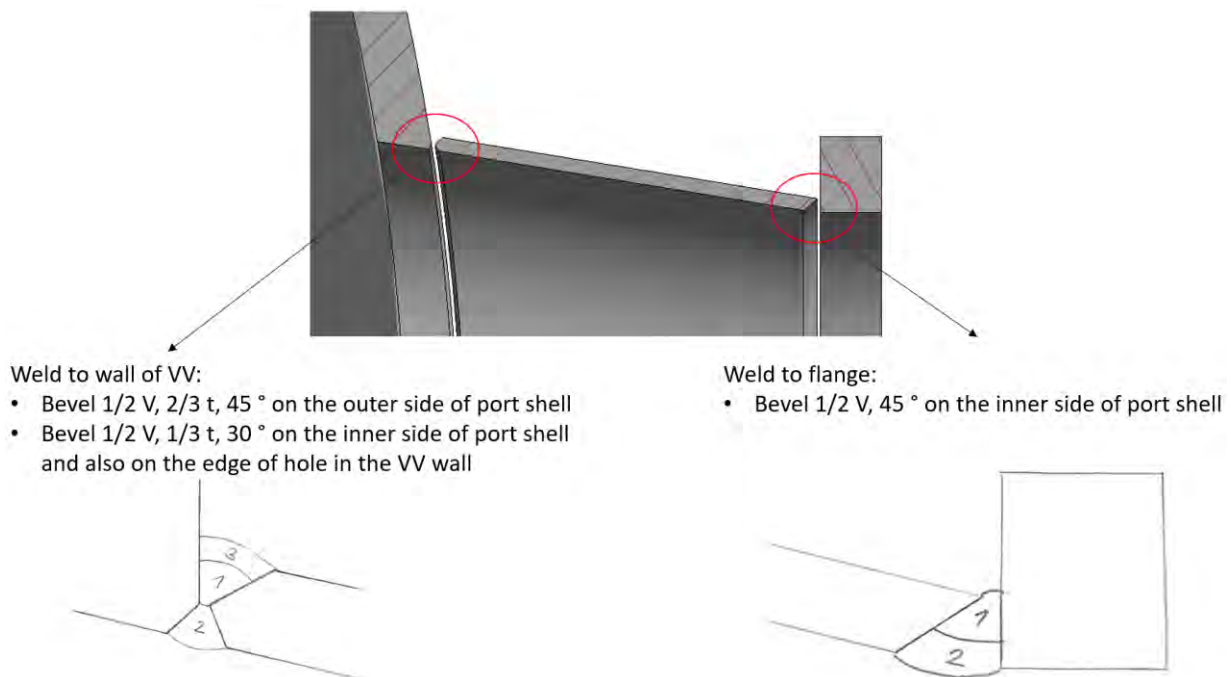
Preparation of weld bevels and corresponding schematics of weld passes layout for joints of the MX port shell to its flange and to the VV wall
